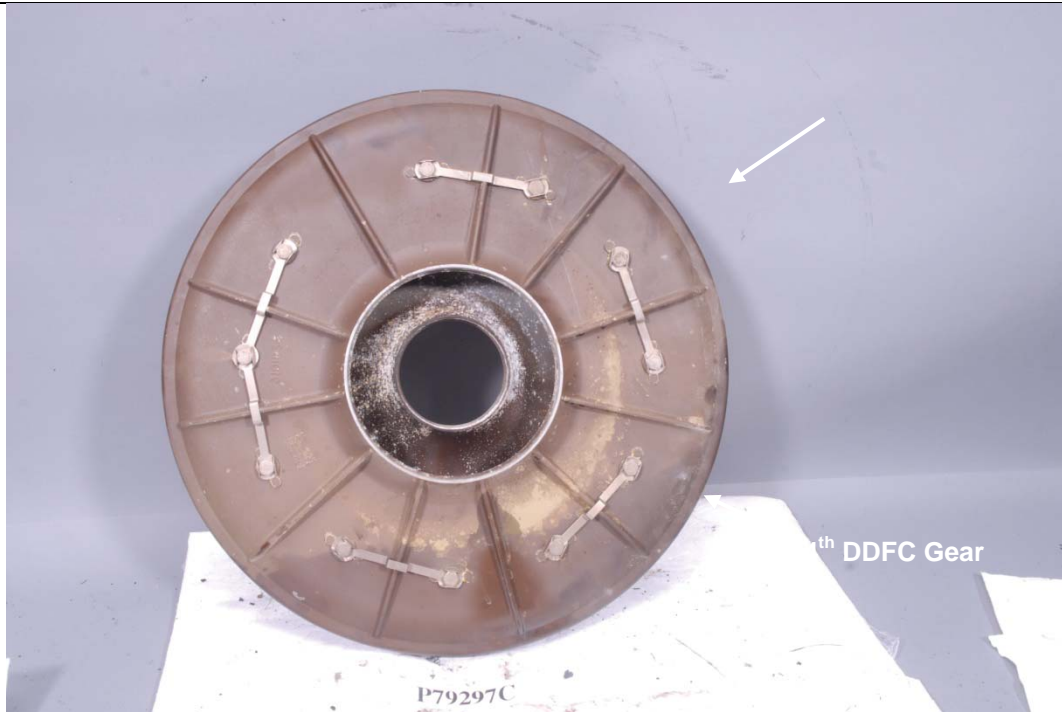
P-79297C, First-Stage Compressor Impeller Knife Seal Witness Marks
